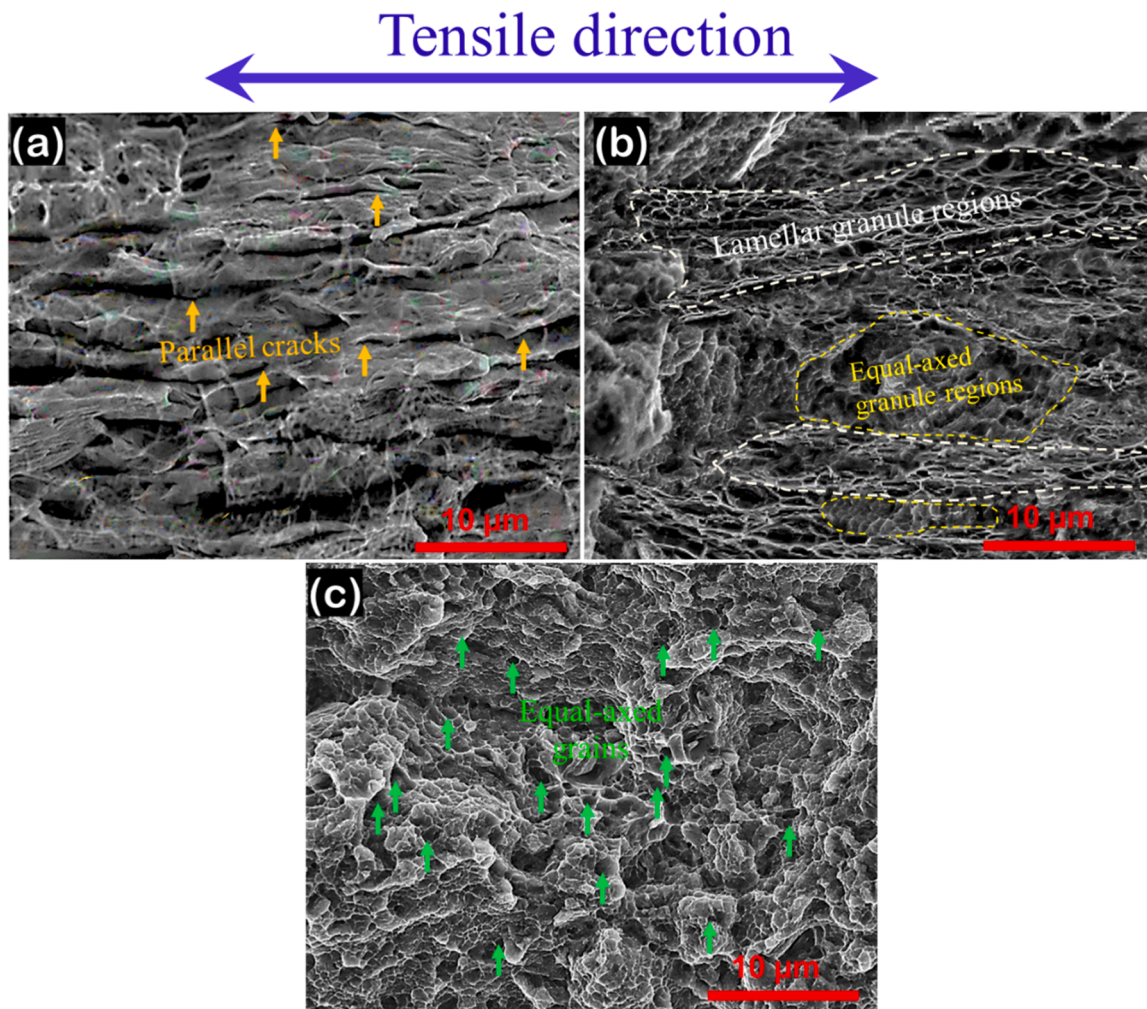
Tensile fracture morphology of (a) 15 min cold-weld, (b) 1 h cold weld and (c) 2 h cold weld, of the sintered compacts. The orange and green arrows indicate parallel fractures and grains with equal-axed grains, respectively. Dashed white and yellow lines also depict areas of lamellar and equal-axed grain structures, respectively. The fractures are aligned parallel to the tensile direction.
